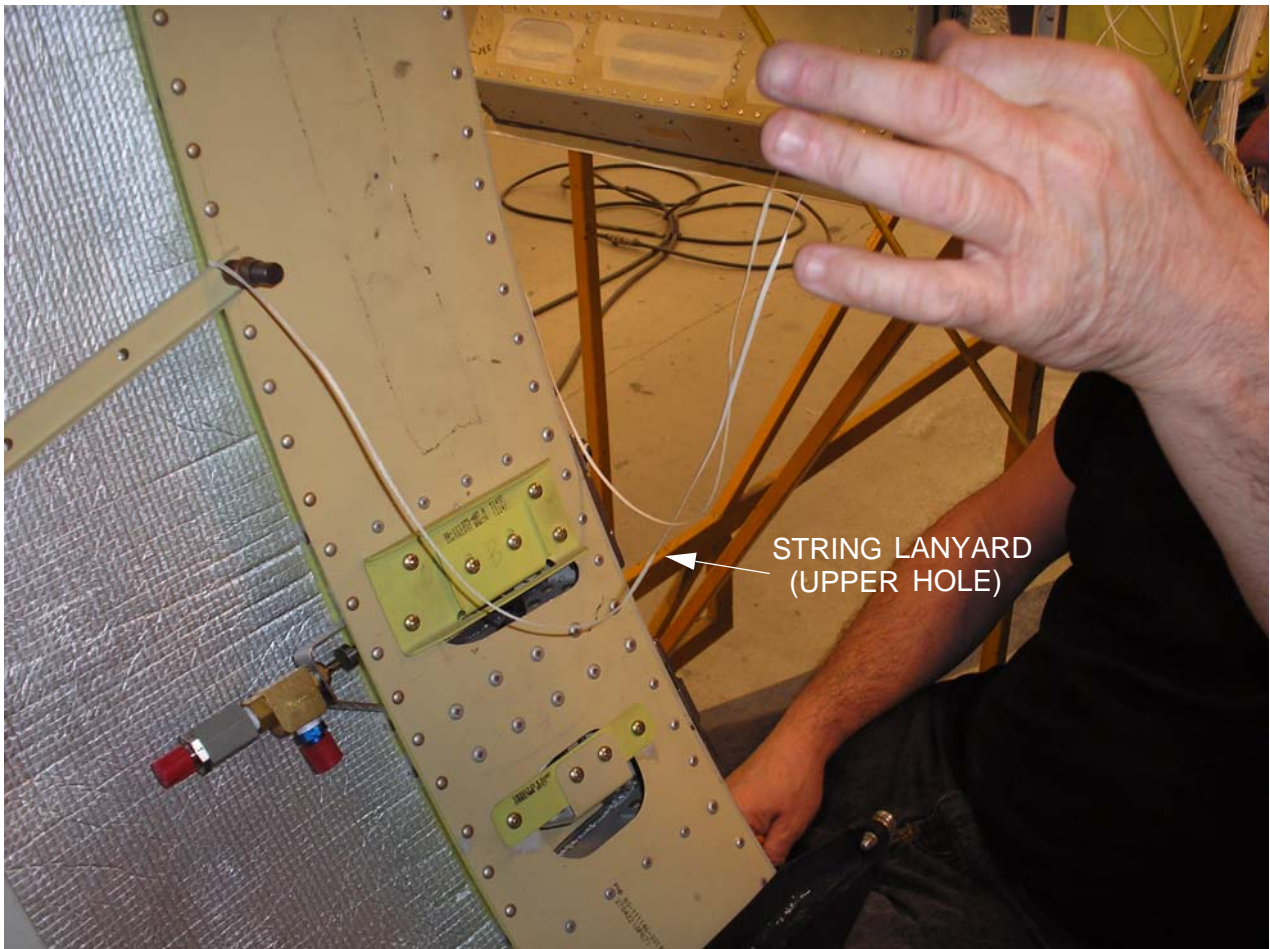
Upper Cabin Door Seal - Removal (Sheet 4 of 4)
